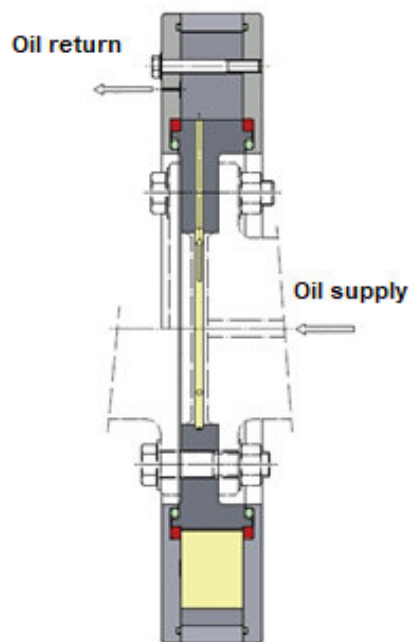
The scheme of oil supply to the spring damper of torsional vibrations [4]
